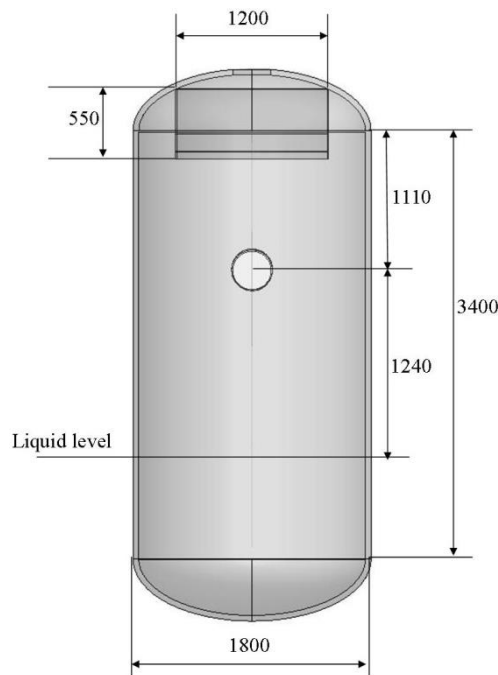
Dimensions of the base geometry vessel in millimeters, outlet pipe omitted from picture
